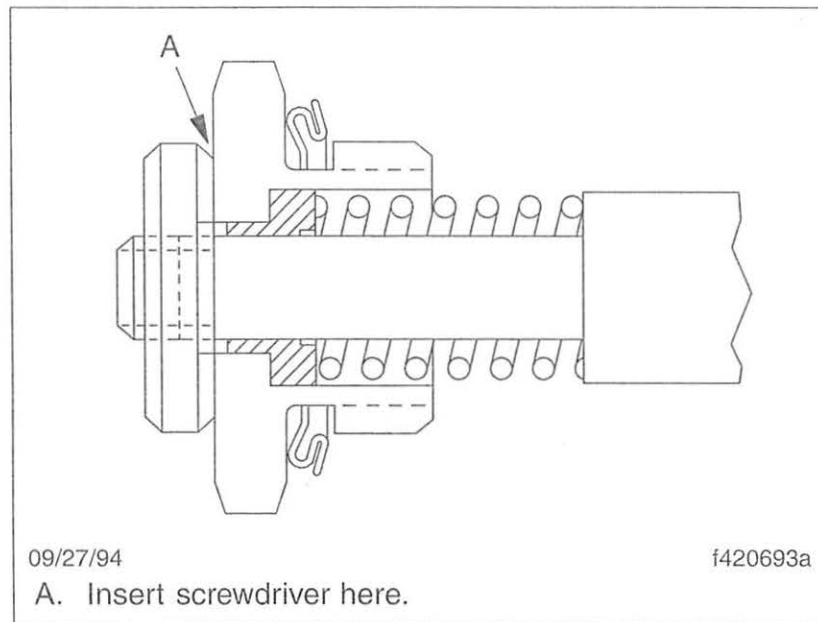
, Pull-Pawl Assembly (sectional view)
